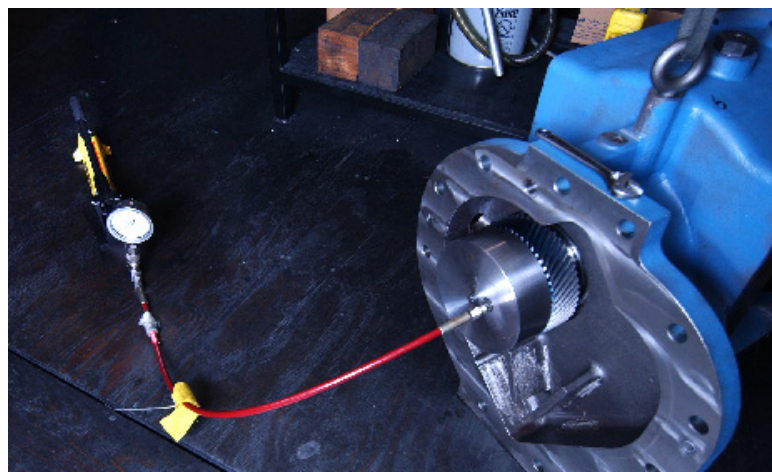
PRESSURIZING TO REMOVE GEAR
